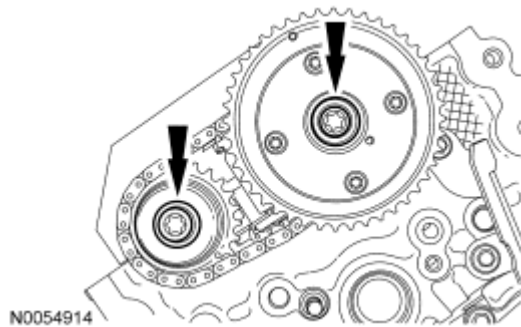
Locating RH VCT Assembly Bolt & RH Exhaust Camshaft Sprocket Bolt
